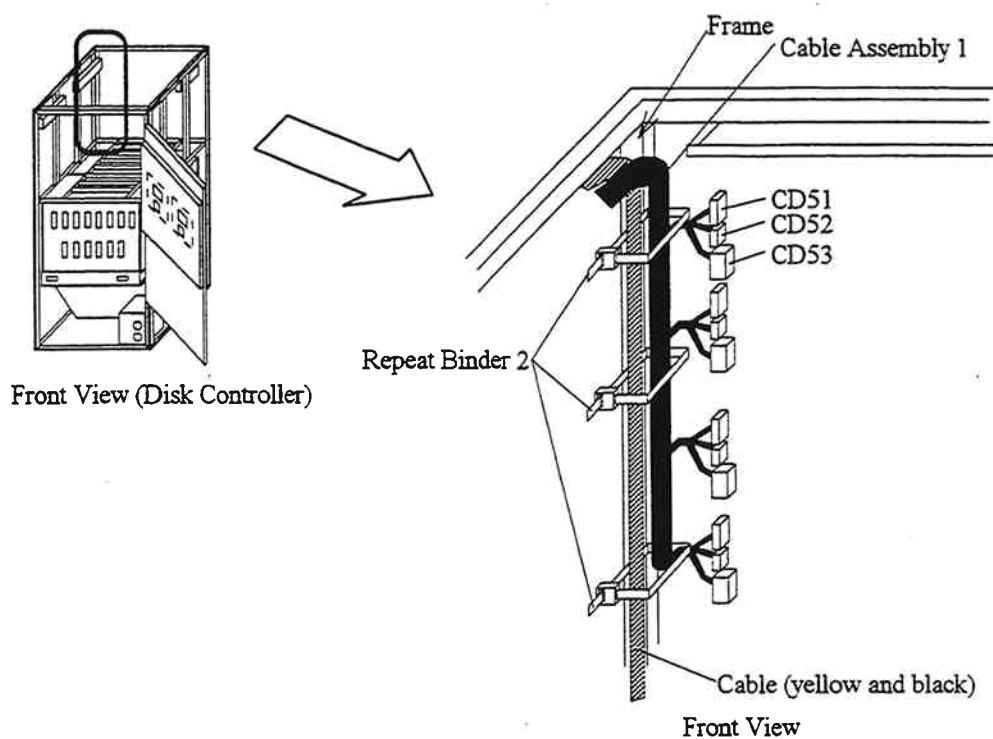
Attachment of the Cable Assembly 1
